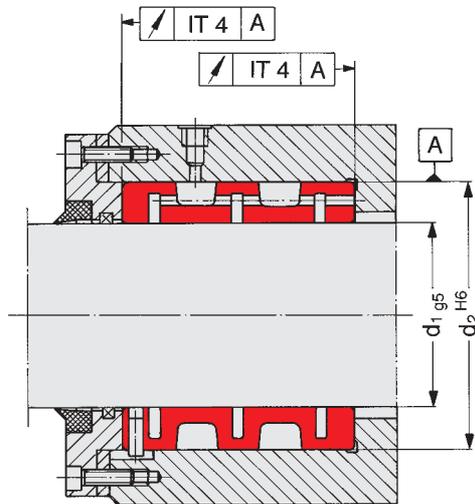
Configuration of connecting components when using a series FDK or FDL guide bushing.
